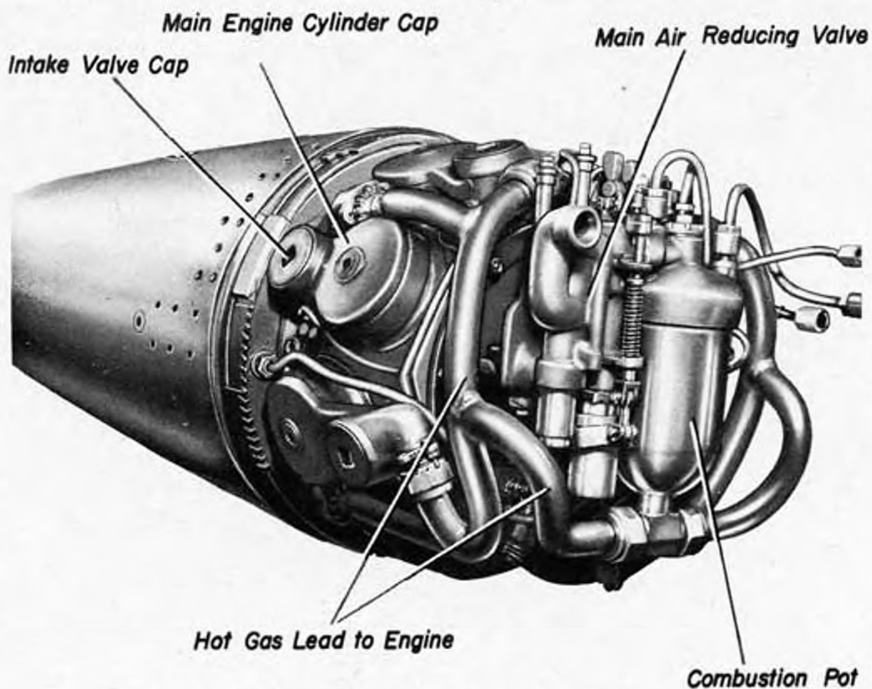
Torpedo Type 91 Mod 3, Engine
